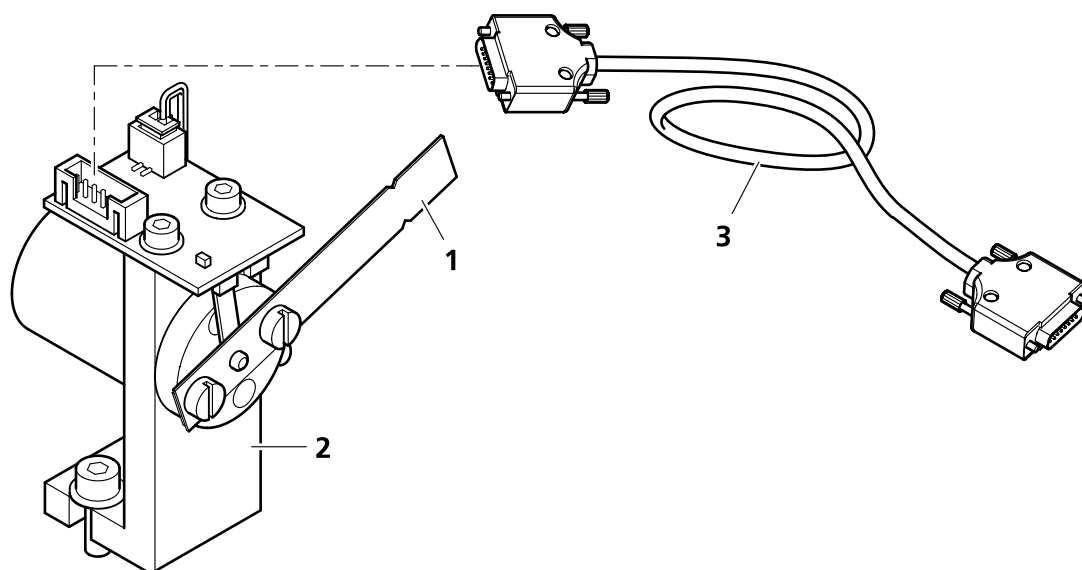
Laser shutter, converter board and connection cable of safety kit for customer-provided laser modules
